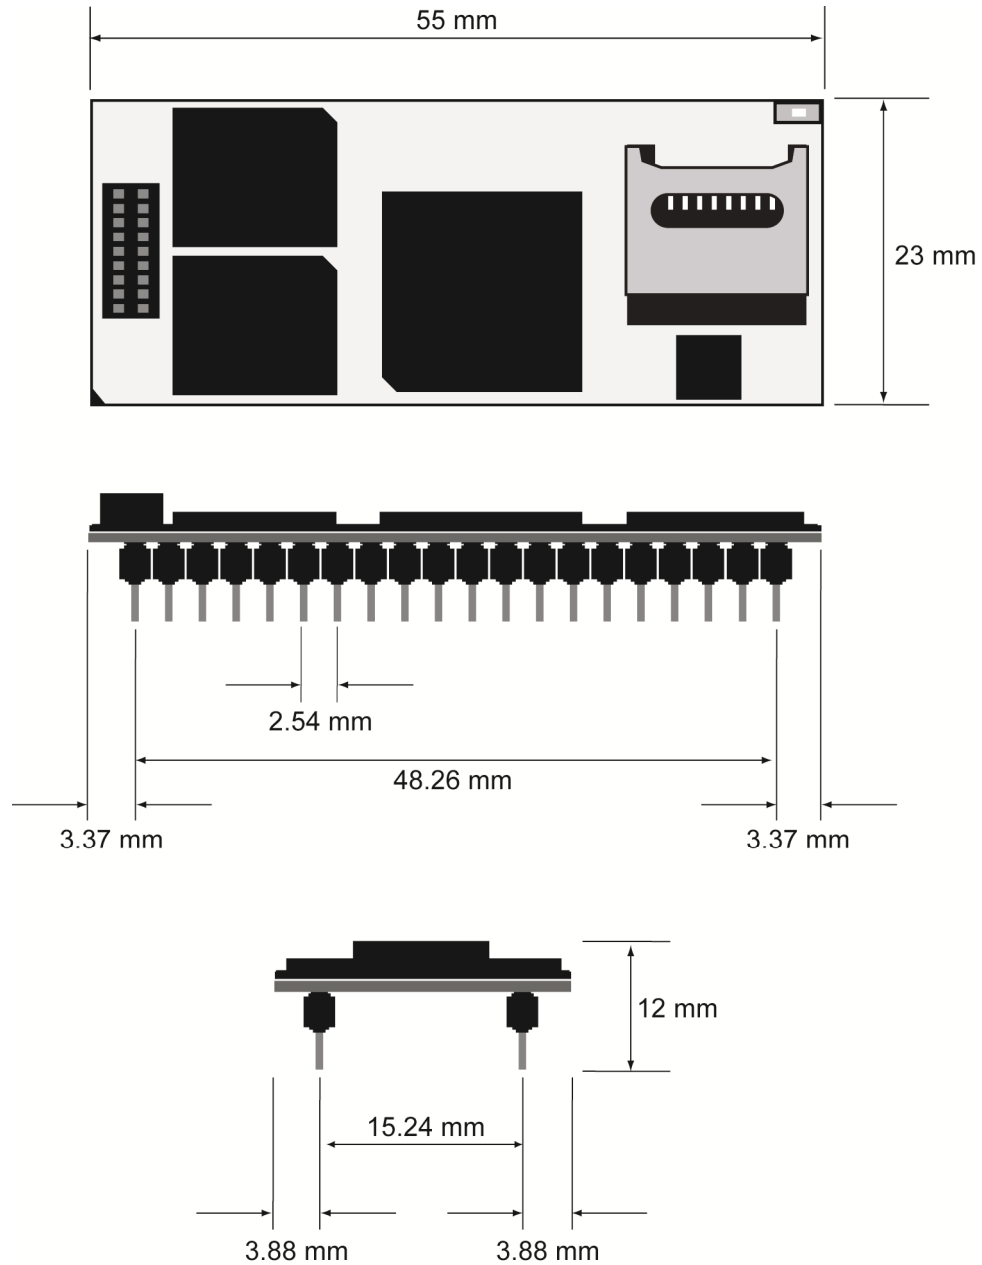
Mechanical dimensions of DIL/NetPC DNP/9535
